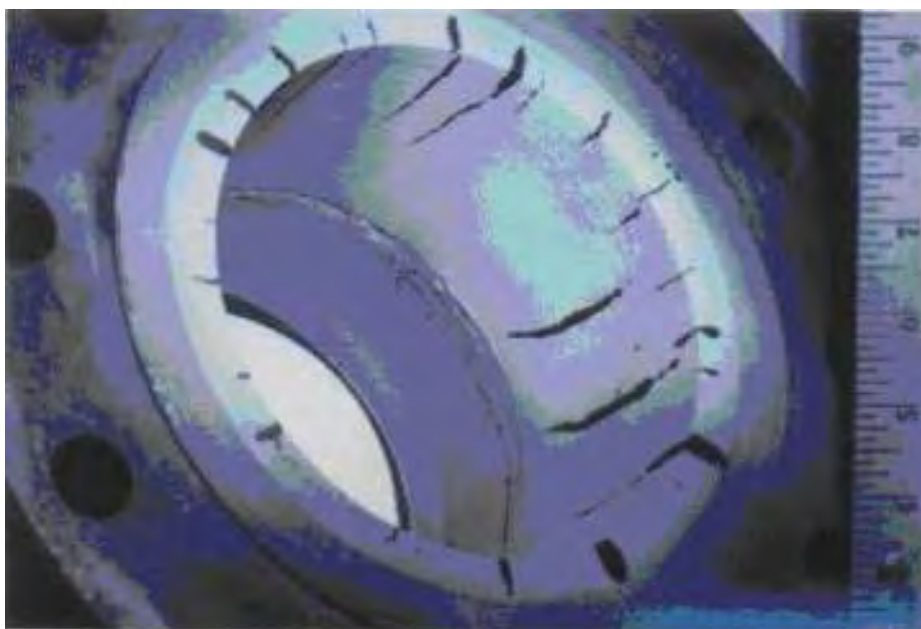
PT inspection of a Type 304 stainless steel catalyst withdrawal line piping and weld neck flange.
